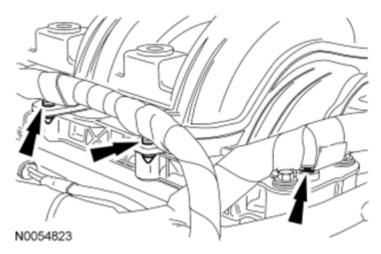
Locating RH Heated Oxygen Sensor Electrical Connector Courtesy of FORD MOTOR CO.
